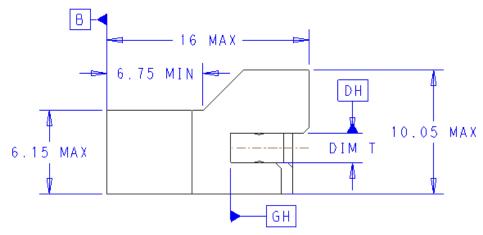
1C, 2C, 4C AND 4C+ STRADDLE MOUNT CONNECTOR PROFILE DIMENSIONS (MM)
